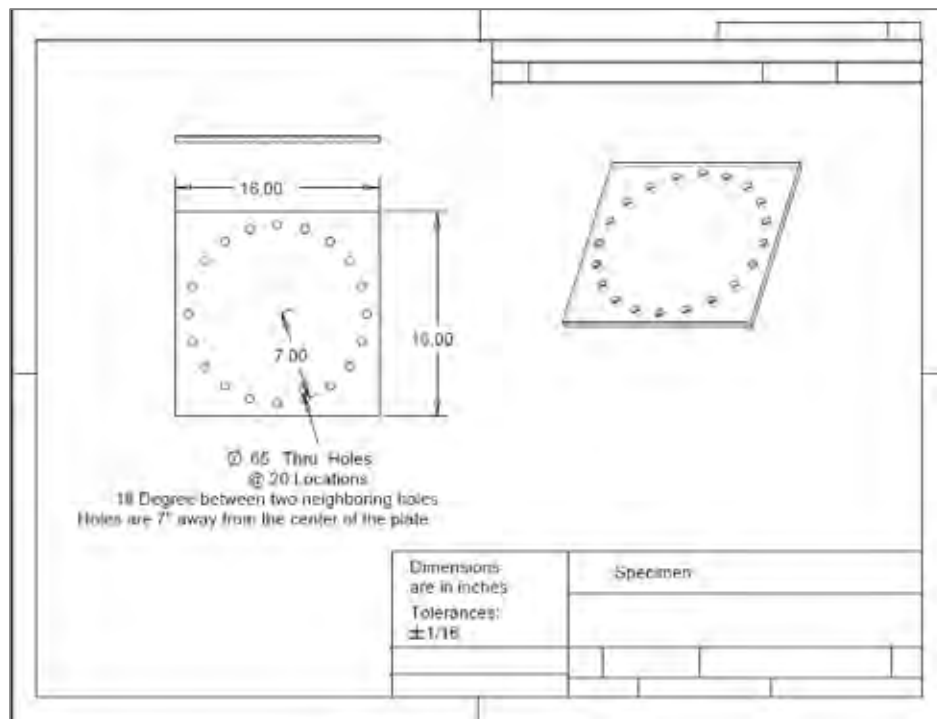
The 16-in.-Square Specimen Showing Location of Bolt Holes
